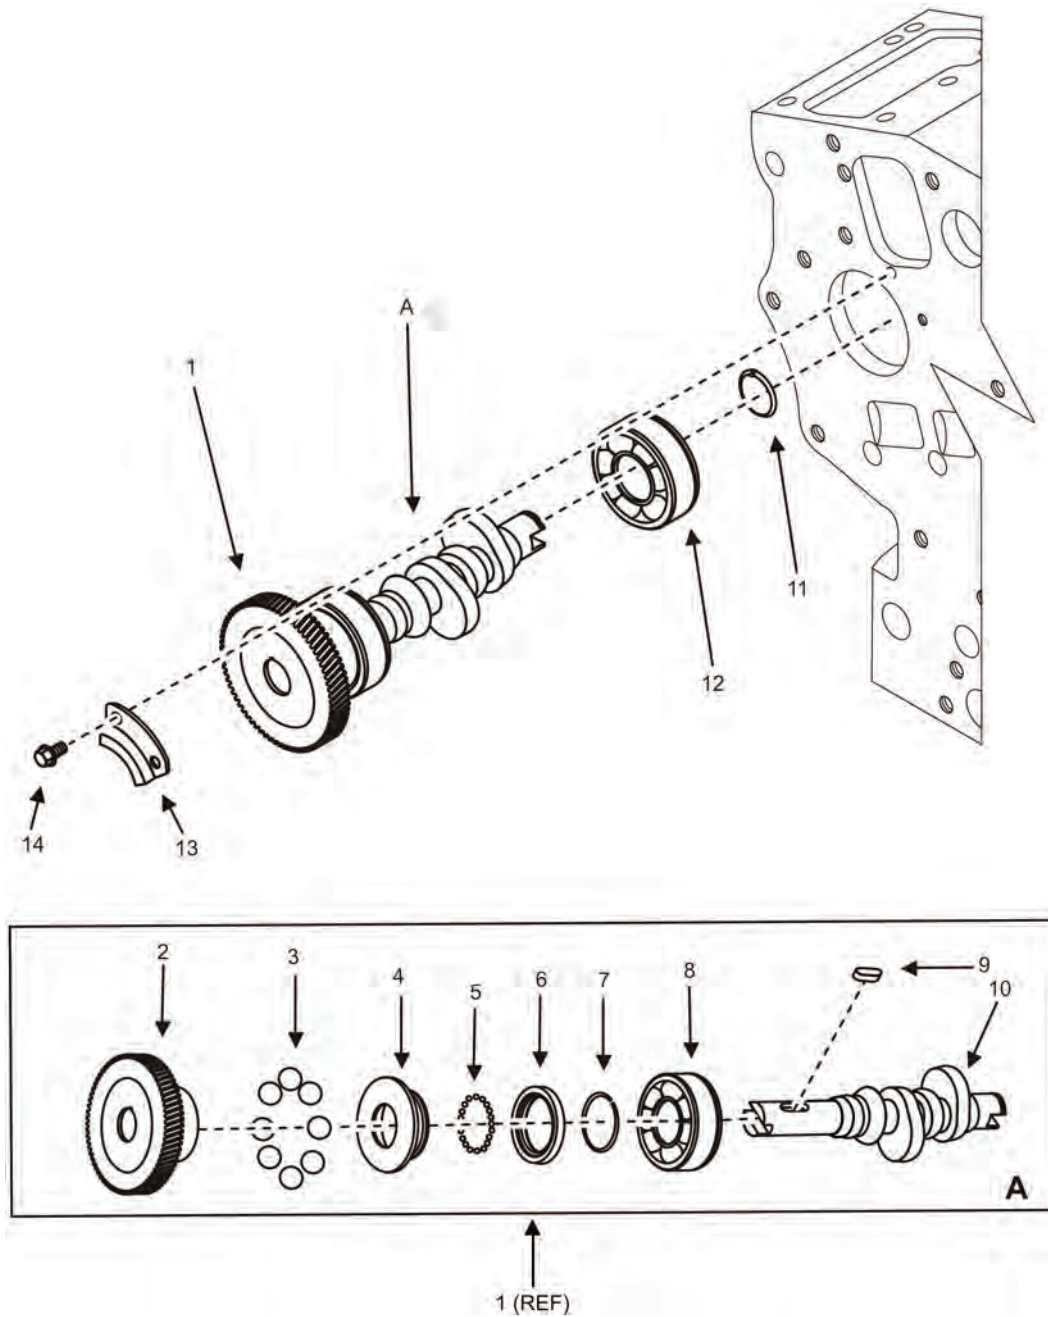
Fuel Camshaft and Fork Assembly (Sheet 1 of 2).
